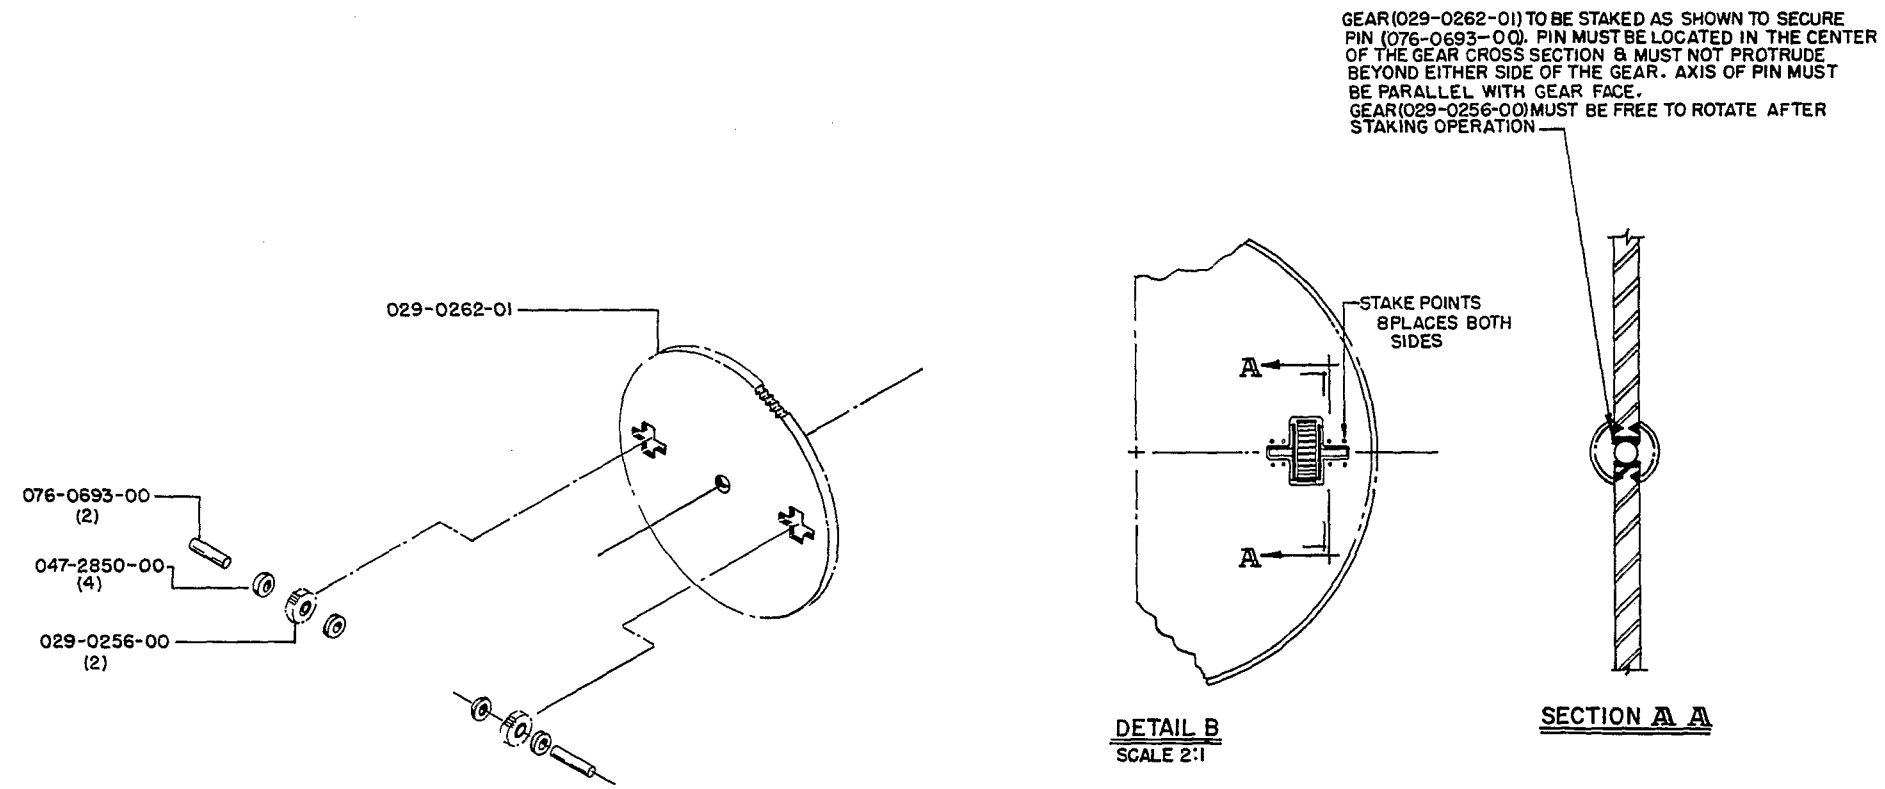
A KI 525A YOKE ASSEMBLY
